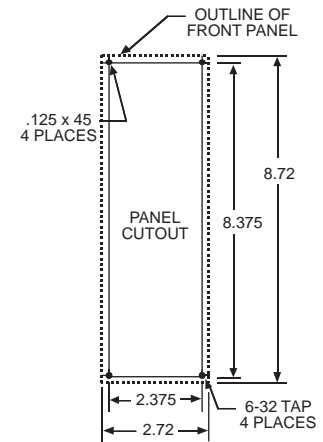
Model 2130 Panel Mounting Cut-Out Dimensions
